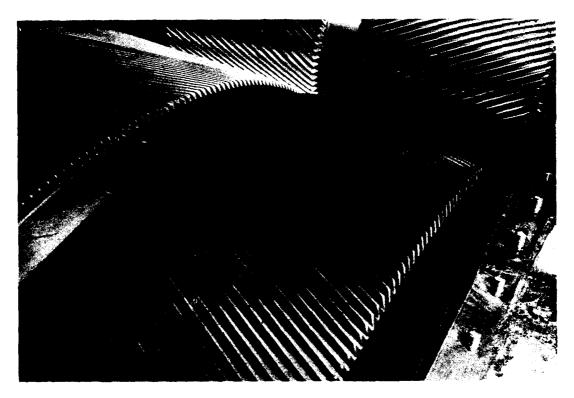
B.—H.M.S. MYNGS—PORT MAIN GEAR WHEEL AND PINION AFTER SHAVING
